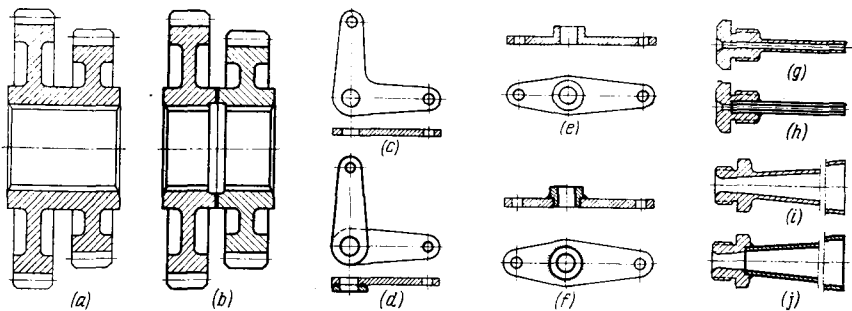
Simplification of machining through introduction of welded constructions
